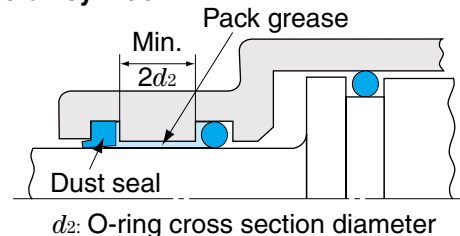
Typical installation of O-ring for dynamic sealing
